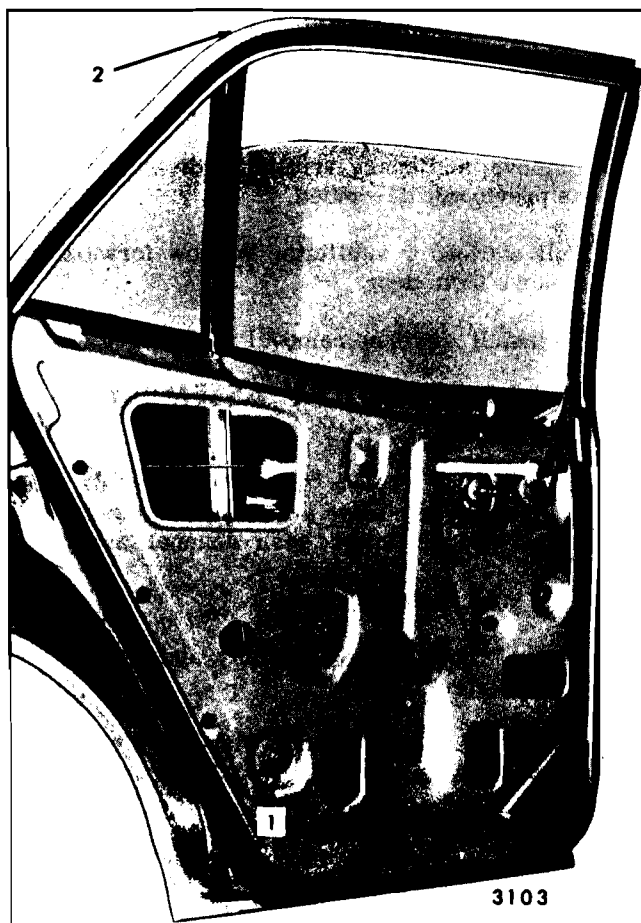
Rear Door Window Removal and Adjustments - "X-69" Styles
